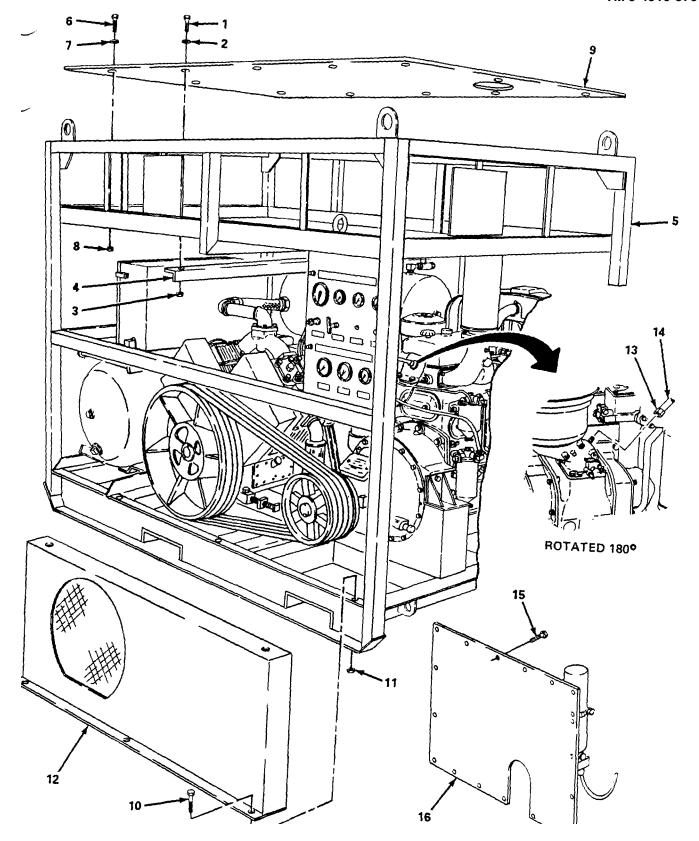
Air Compressor, Removal (Sheet 1 of 2).
